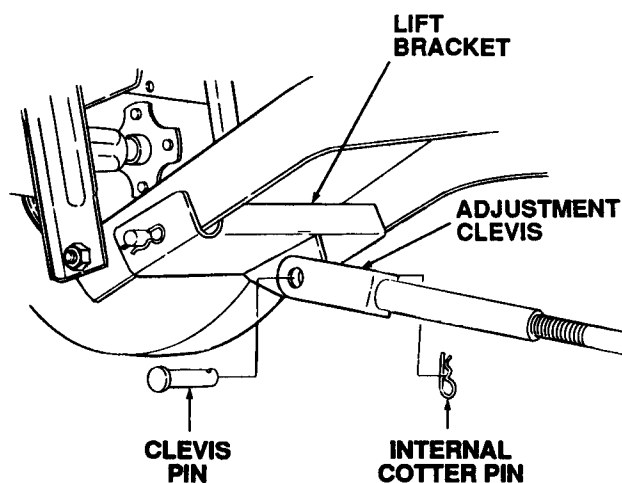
Attaching Adjustment Rod to Lift Bracket.
